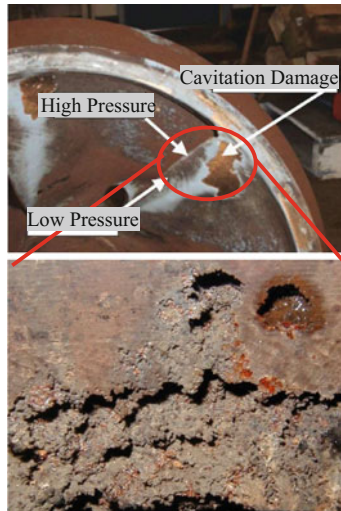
A sample of cavitation corrosion of pump impeller
